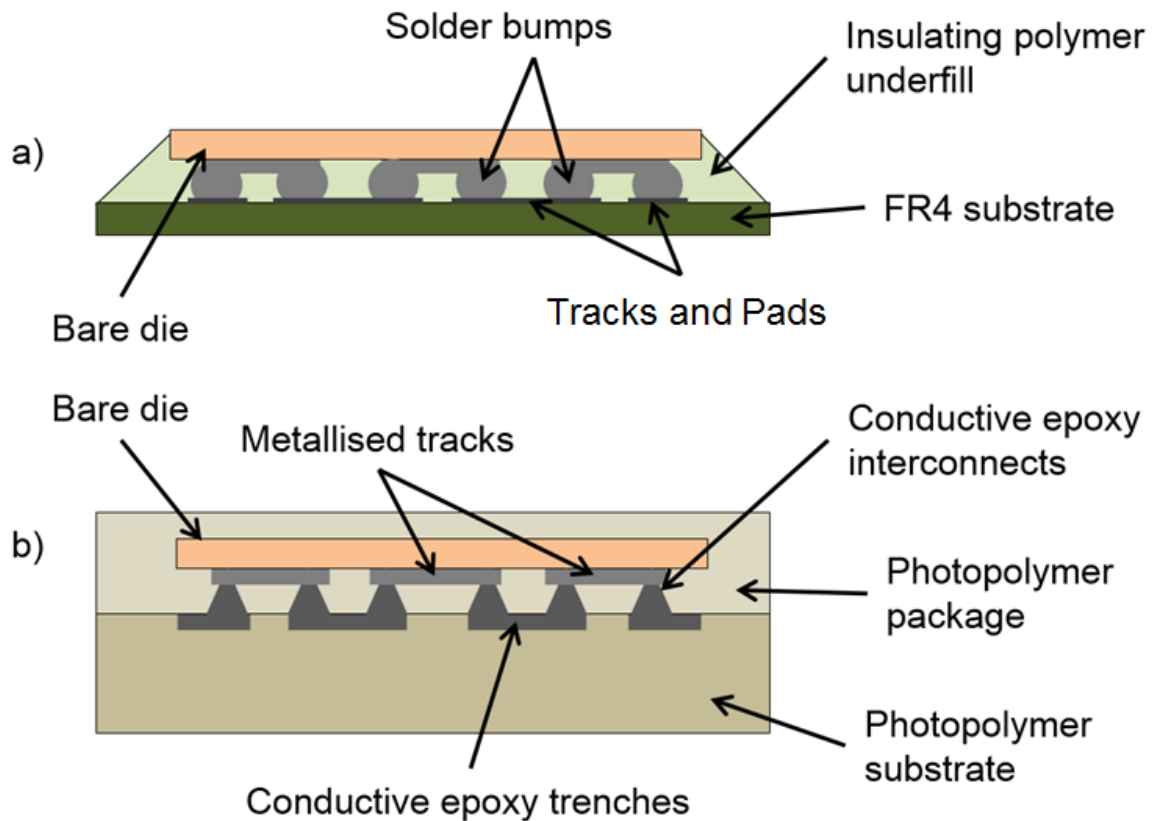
Examples of a) traditional solder based FC on board and b) additively manufactured flip chip packages
